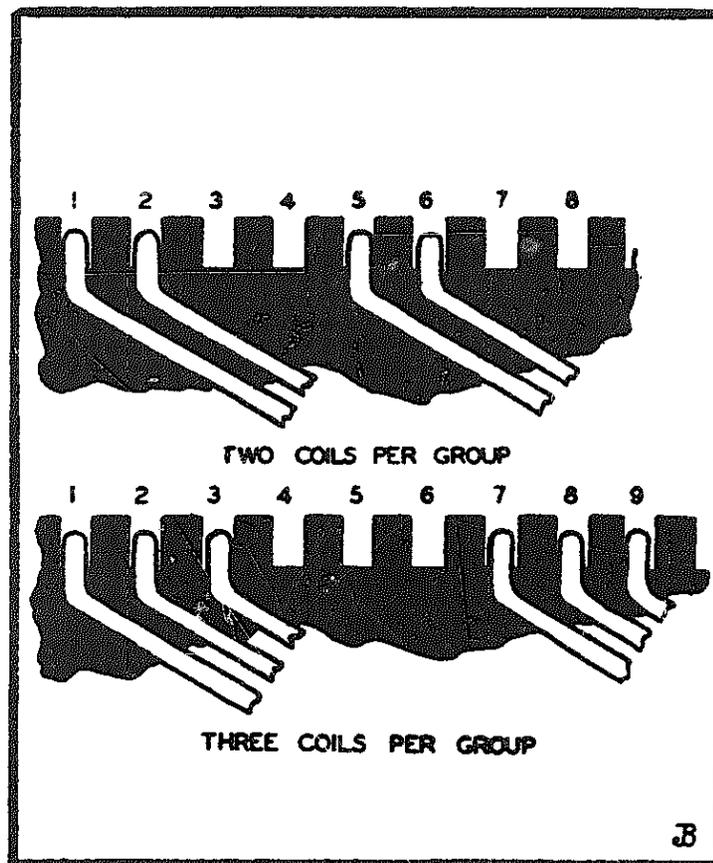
Method of starting a two-layer winding with one coil side per slot
